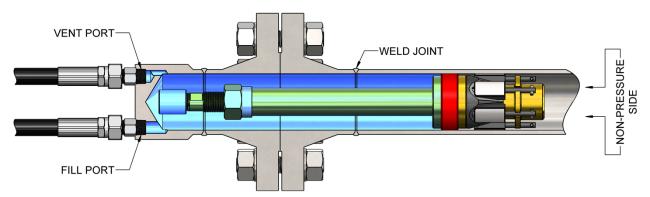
GripSafe Weld Neck Flange Hydrotesting
